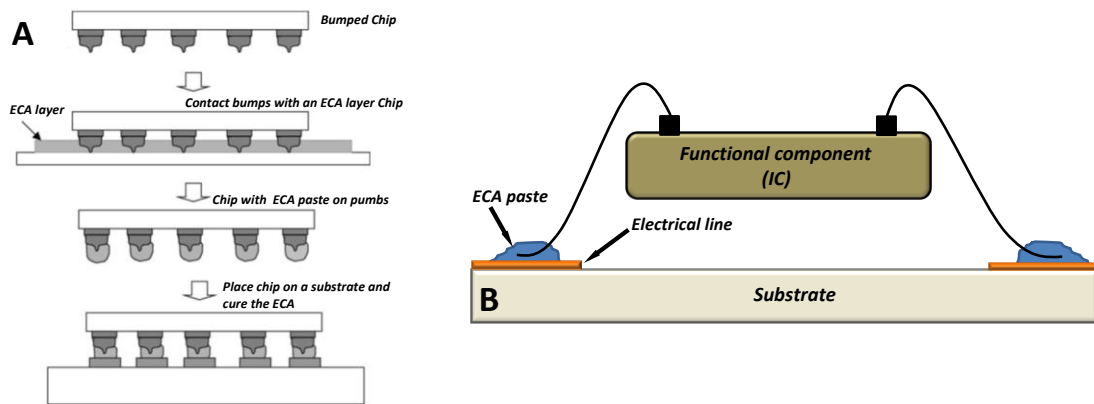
The schematic of two first level packaging techniques using ECA paste, A) flip chip, and B) wire bonding [11].
